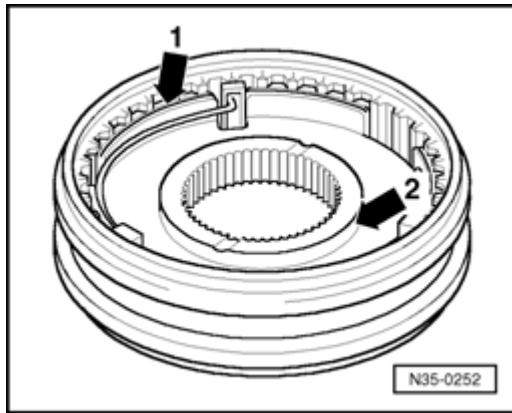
Installation position of 1st and 2nd gear locking collar/synchro-hub
